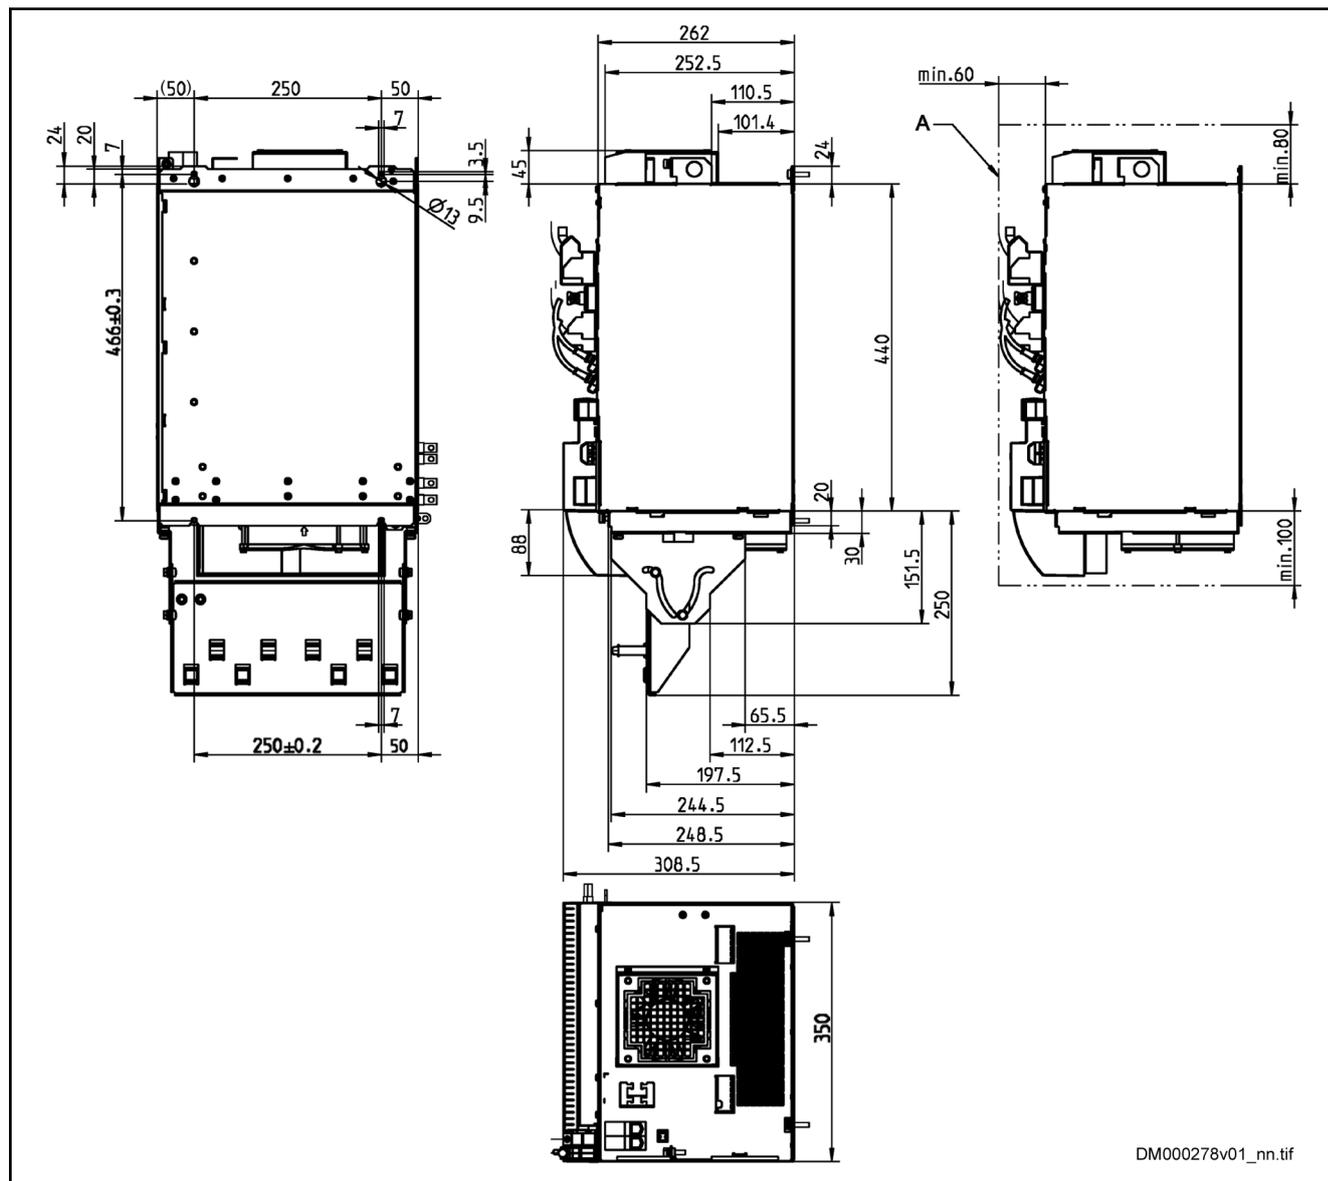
Dimensional drawing HCS03.1E-W0210 with HAS02
